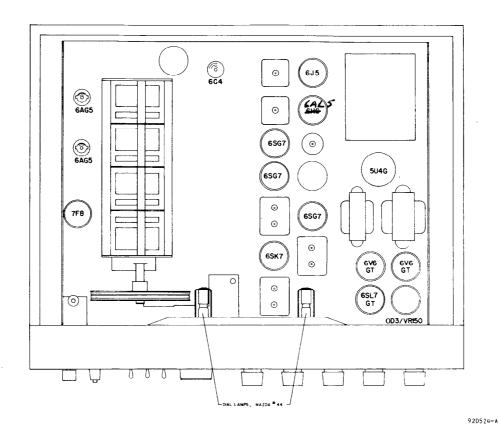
Top View Showing Location of Tubes and Dial Lamps
